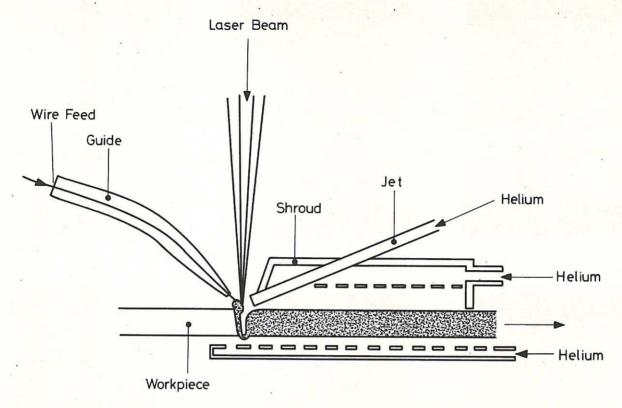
Laser Welding and Wire Feed Arrangement.
